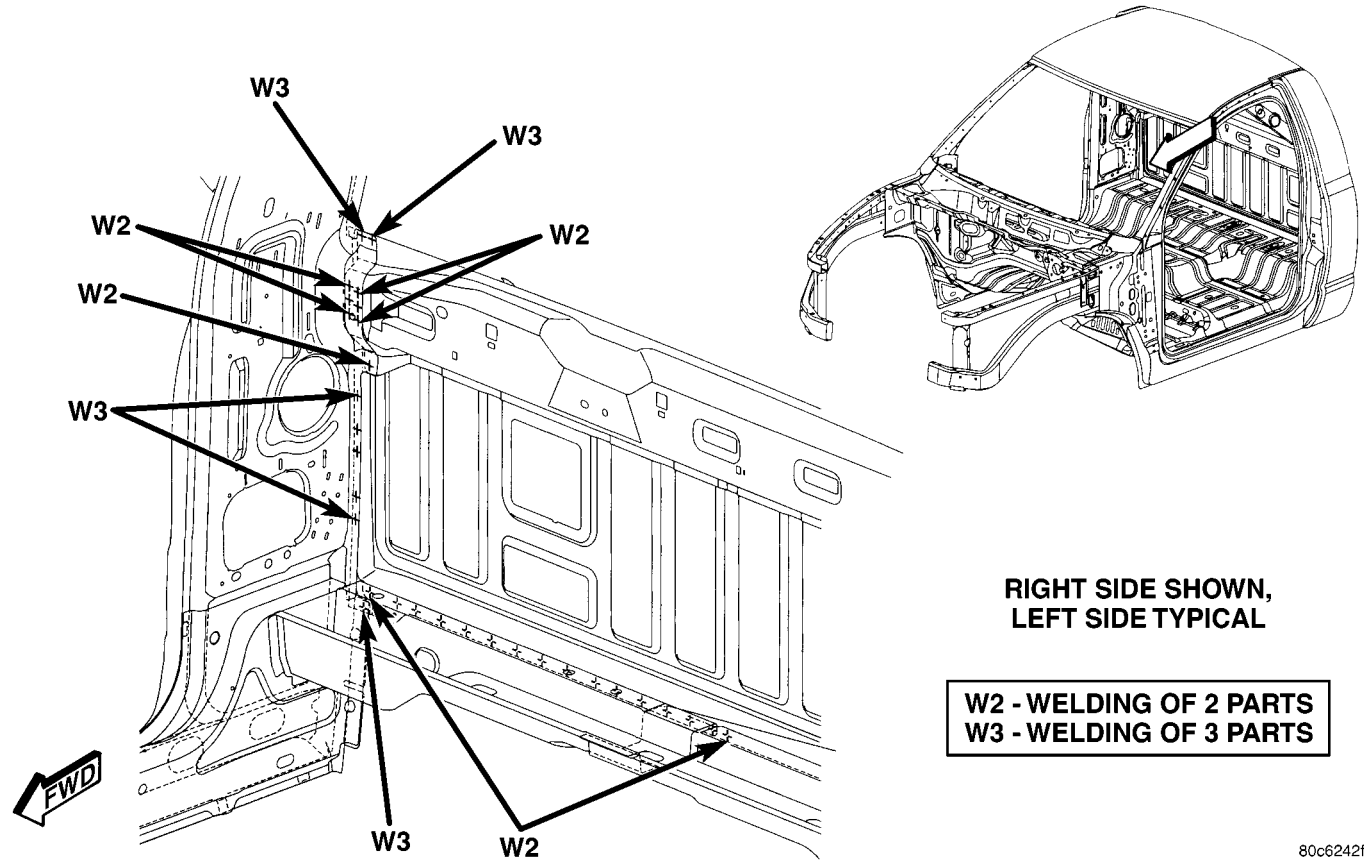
BACK REINFORCEMENT - STANDARD CAB
